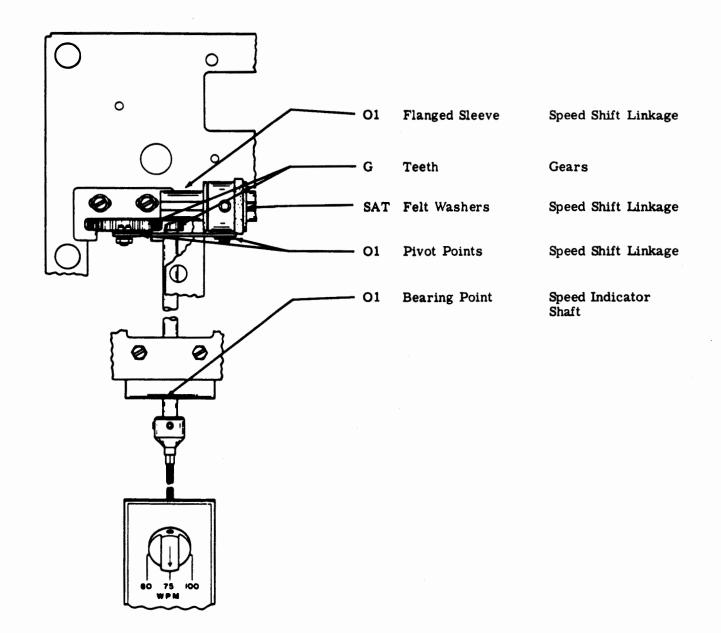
Gearshift Mechanism for Tape Printer Keyboard (Sheet 1 of 2)
